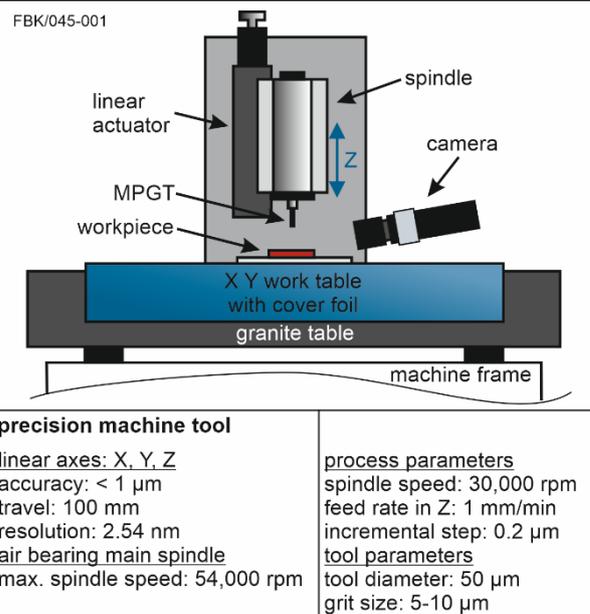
Machine tool according to [2] in front view and relevant Parameters
